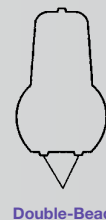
The camshaft cover gasket is an engineered shape with a double-bead.
